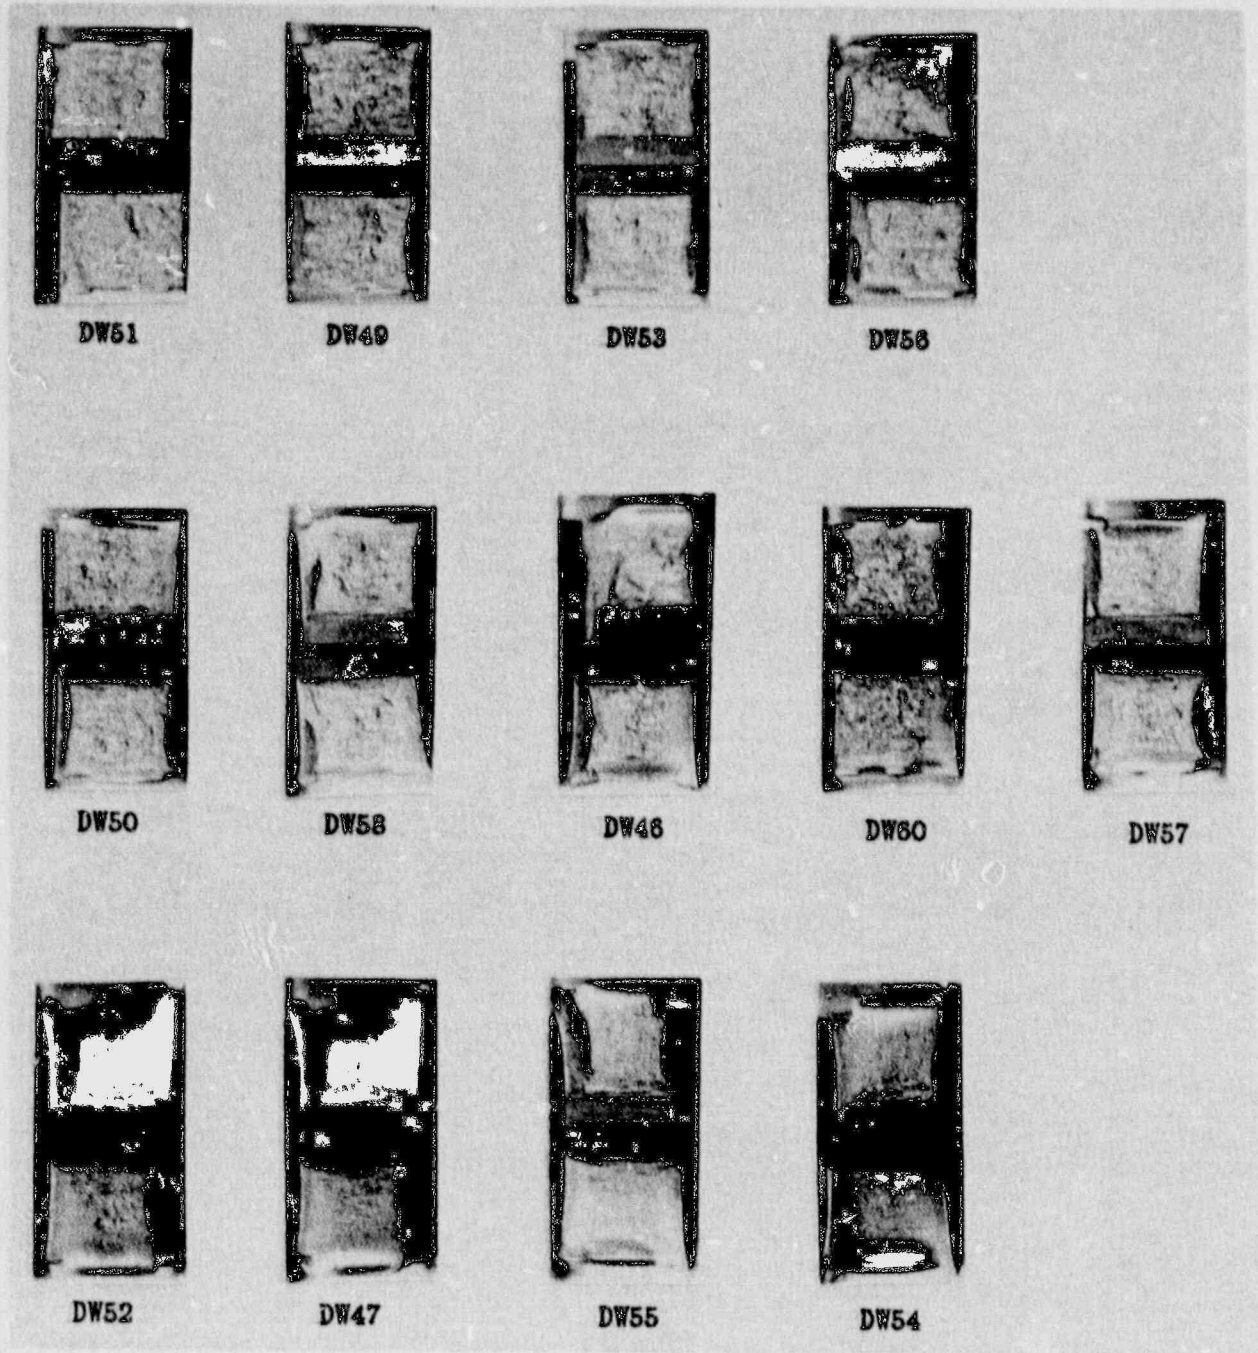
CHARPY IMPACT SPECIMEN FRACTURE SURFACES FOR MCGUIRE UNIT 1 REACTOR VESSEL WELD METAL
